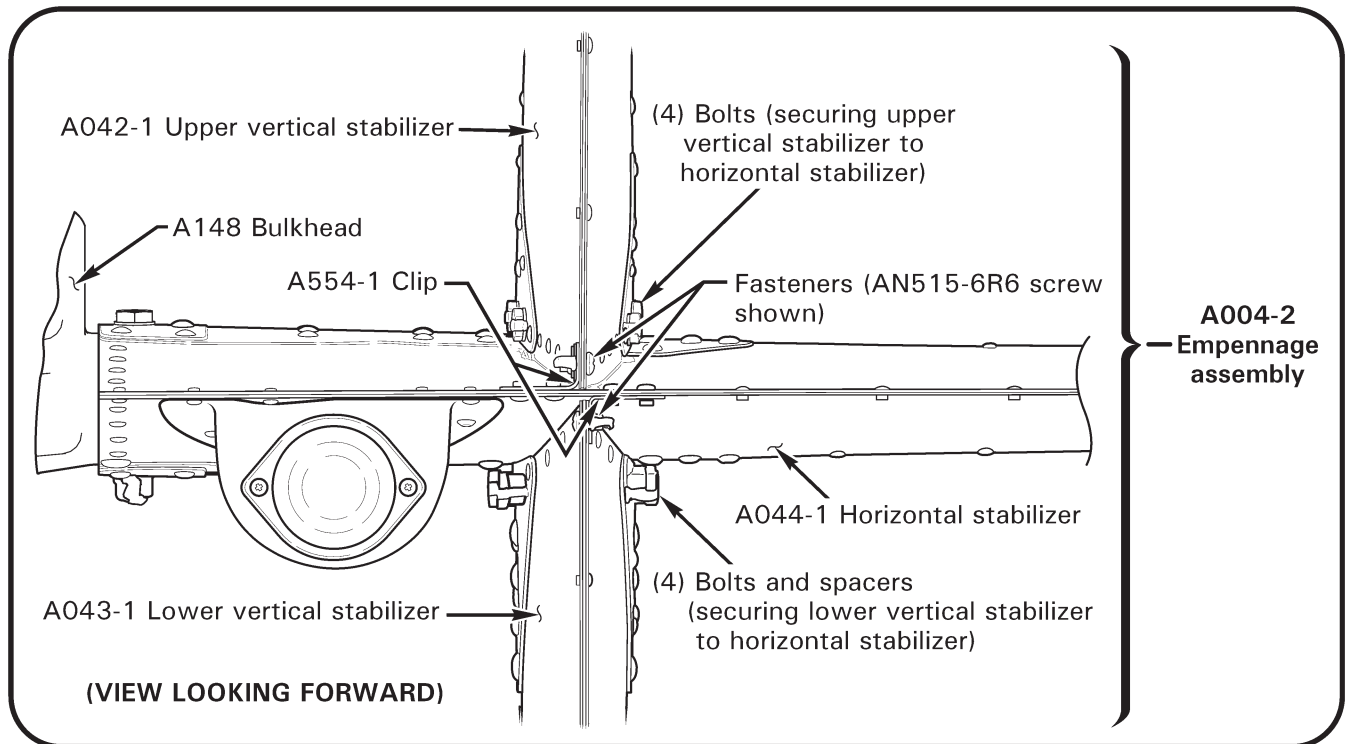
A A004-2 EMPENNAGE ASSEMBLY INSTALLATION
